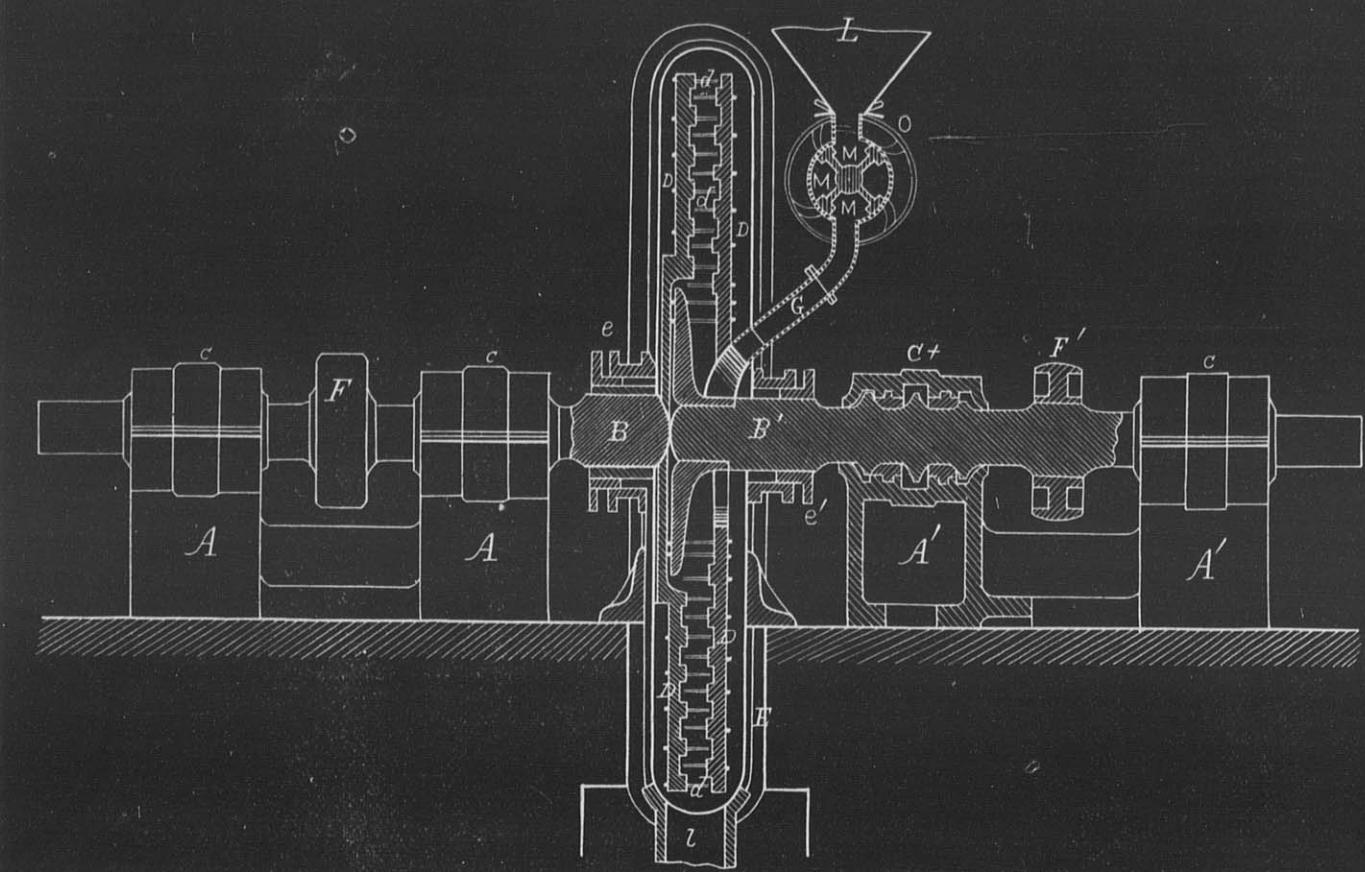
CARR-TOUFFLIN DISINTEGRATING FLOUR MILL.—PART SECTION AND PART ELEVATION.
